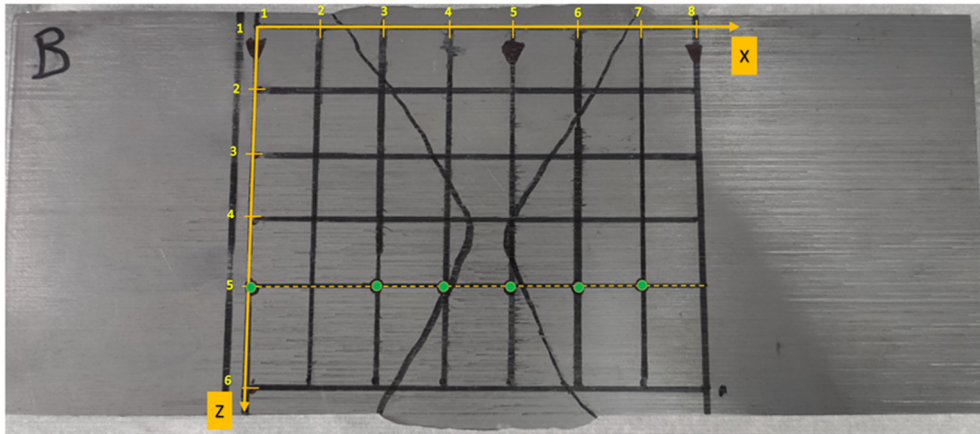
Weld sample with a grid of measurement points for hardness and residual stress testing [8]
